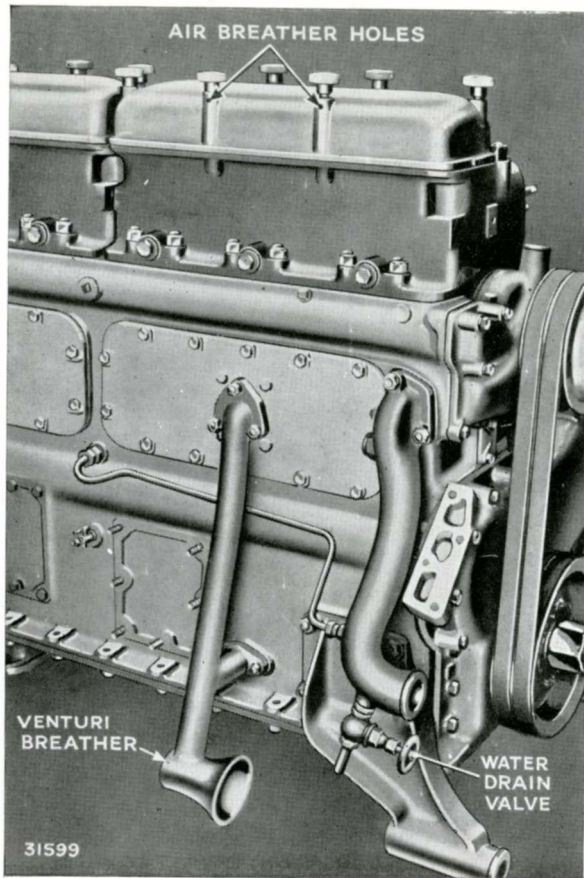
ARRANGEMENT OF ENGINE BREATHING
